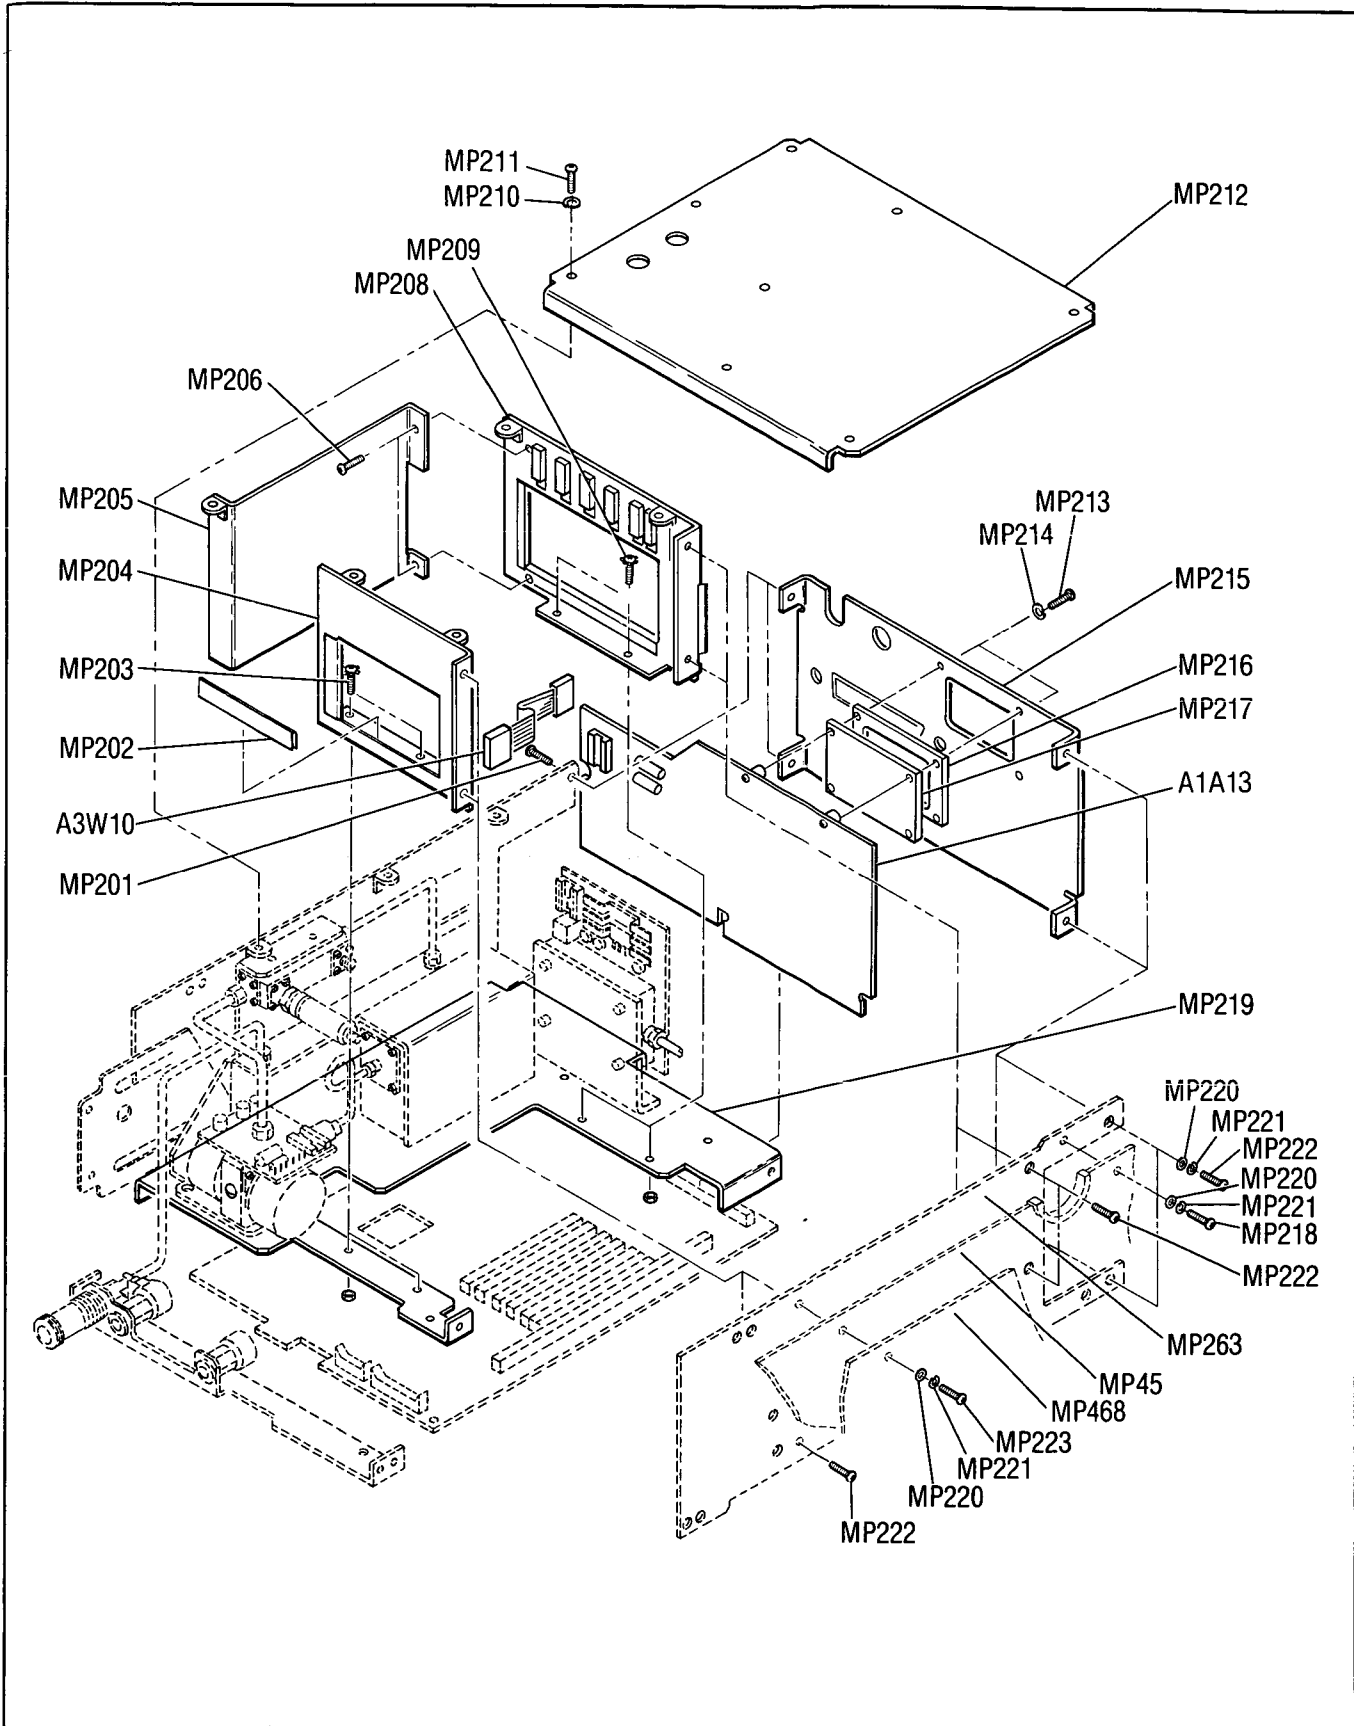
A1 Card Cage Illustrated Parts Breakdown
